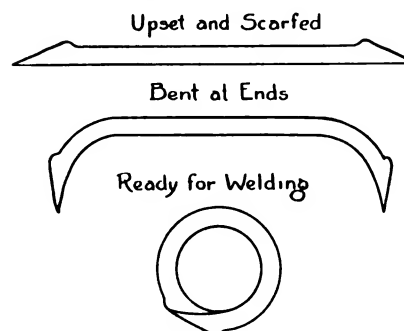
THE THREE SUCCESSIVE STEPS IN WELDING A RING AS DESCRIBED BY MR. STEELMAN
